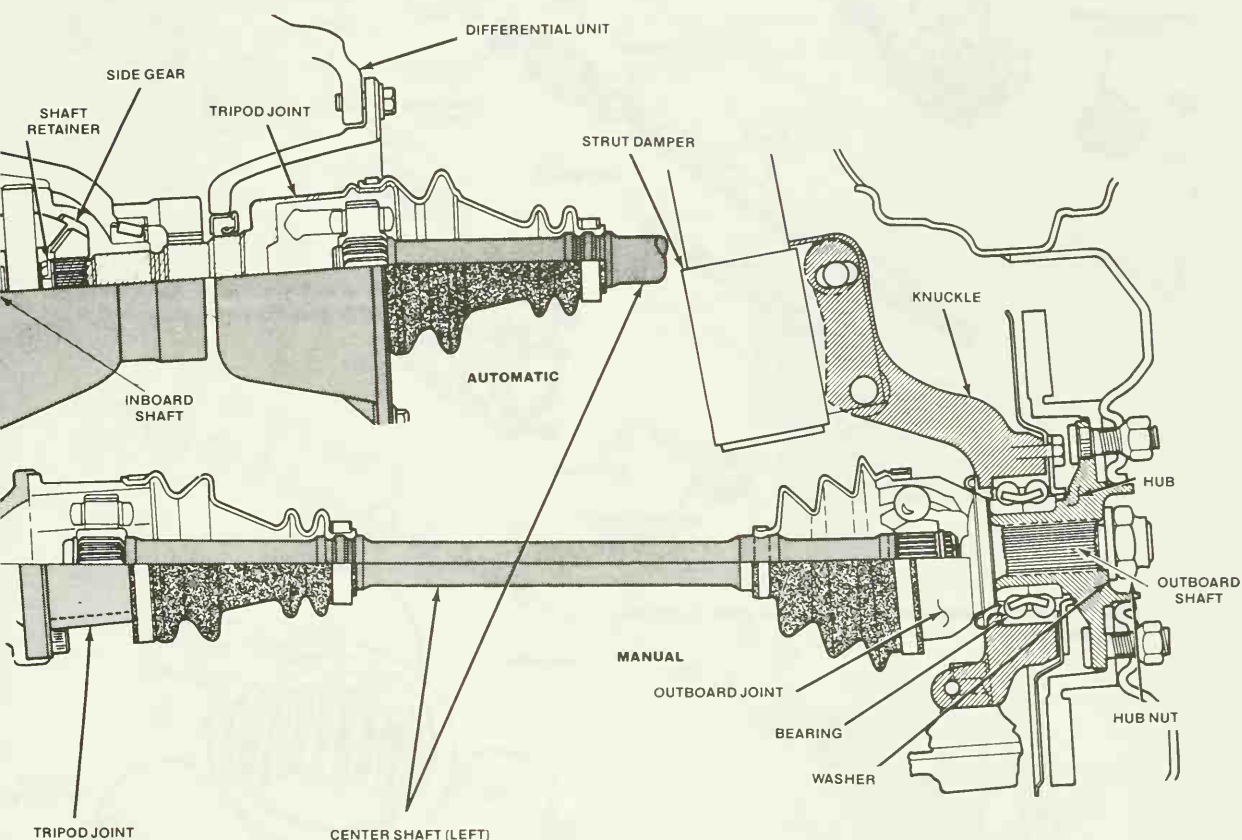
A front-drive axle shaft uses three separate shafts and two flexible joints. (Chrysler Corporation)
